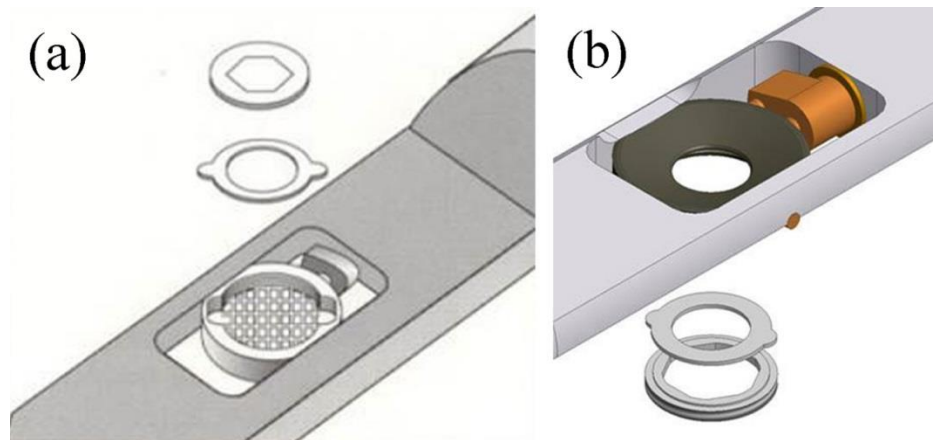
Schematic of front and back side view of the Gatan double tilt TEM sample holder. (a) front side view (b) back side view
